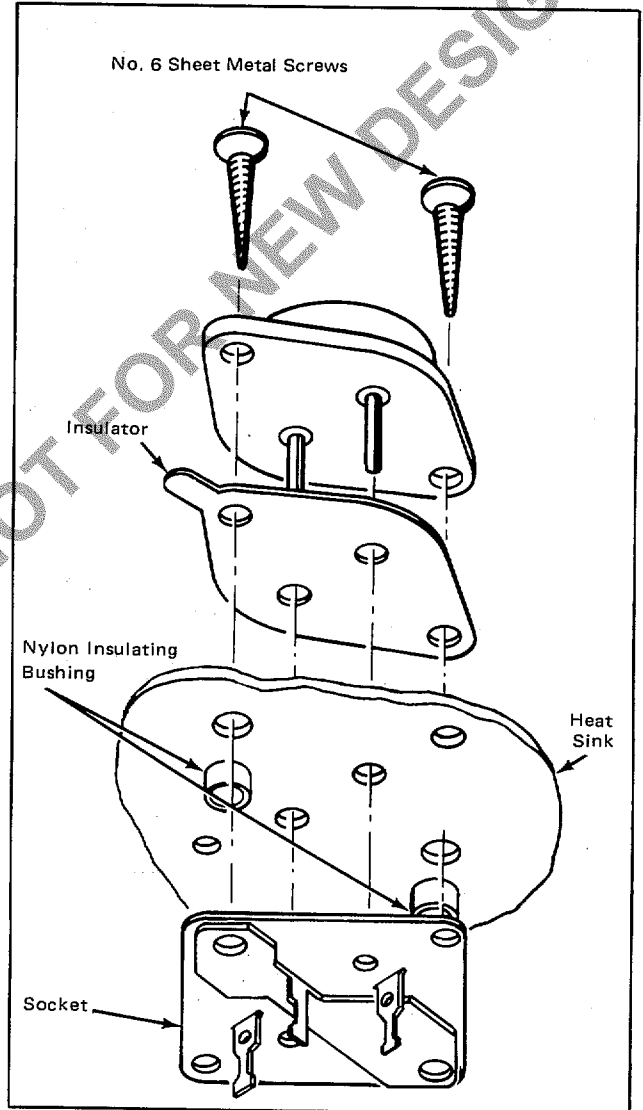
Mounting Details for Flat-Base Mounted Semiconductors (TO-3 Shown).
